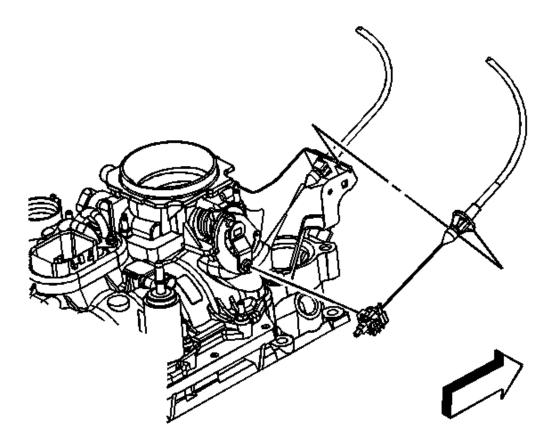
View Of Cruise Control Cable & Accelerator Control Cable Bracket Courtesy of GENERAL MOTORS CORP.
